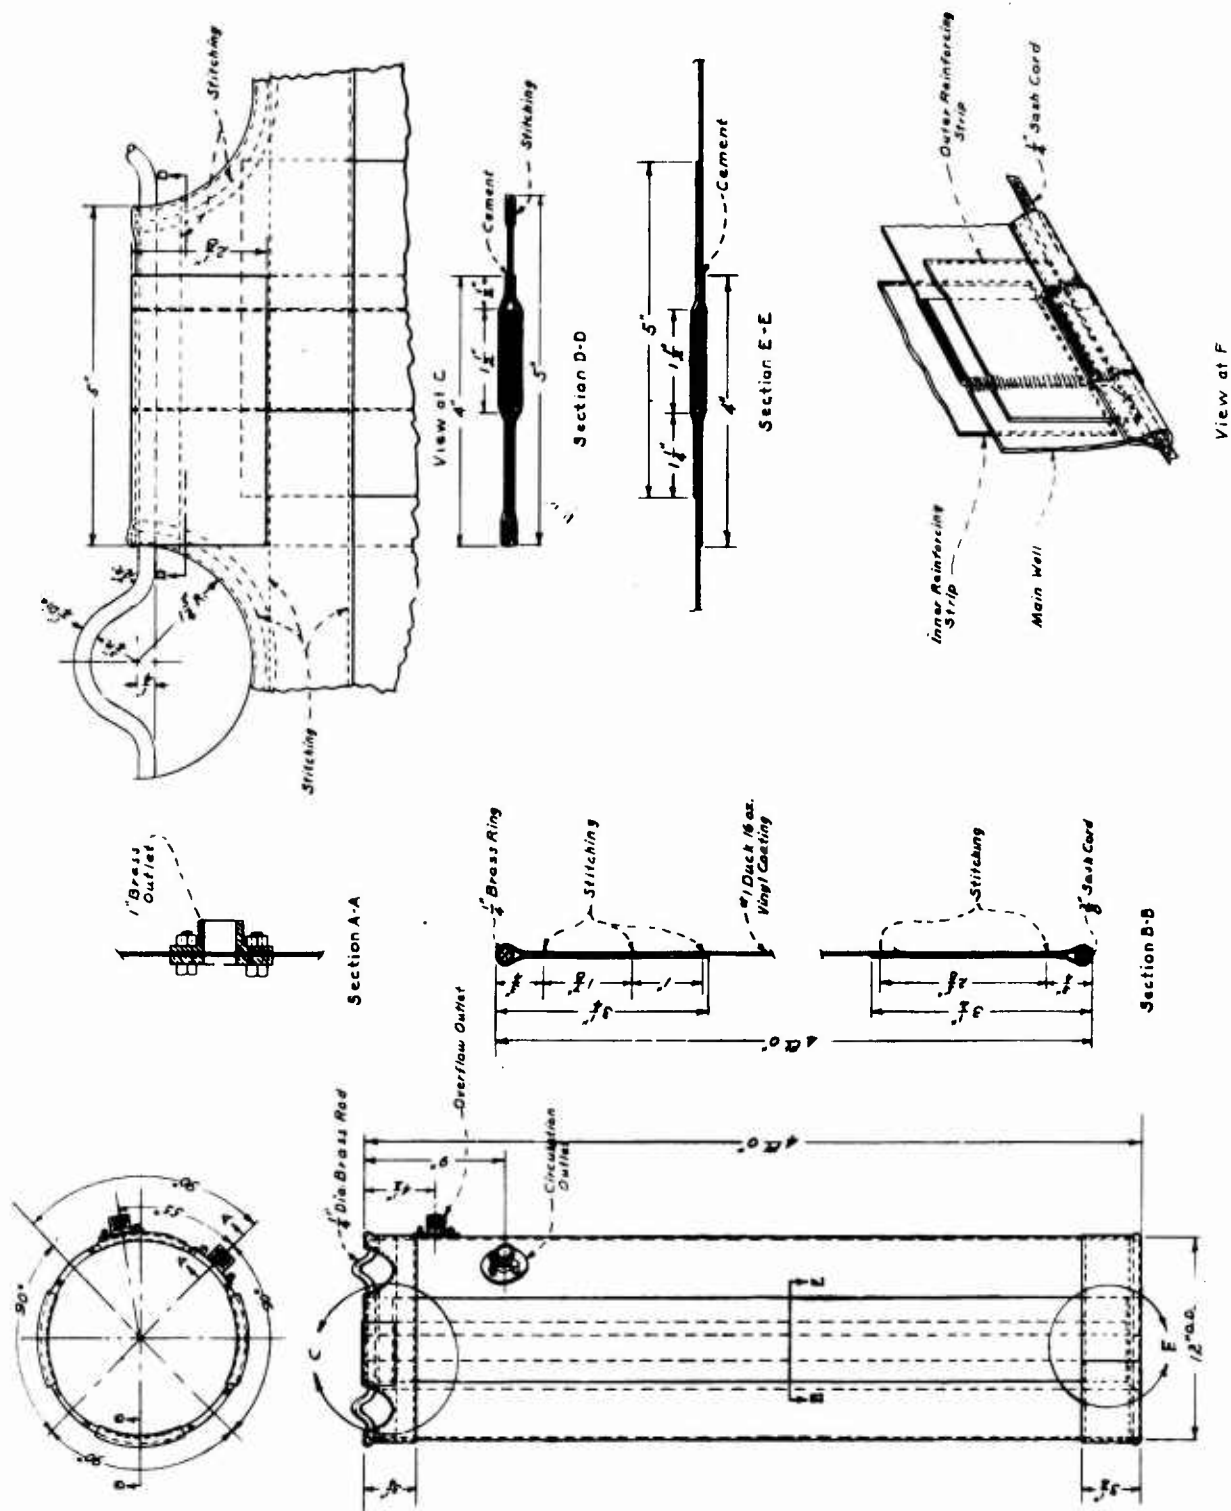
PLAN, ELEVATION, DETAIL, MACERATION TANK
